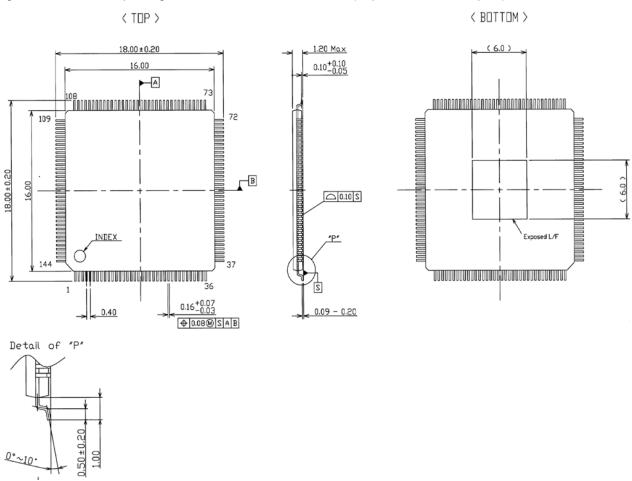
KL5BPLC200WMP package outline (Exposed TQFP-144 pins)
